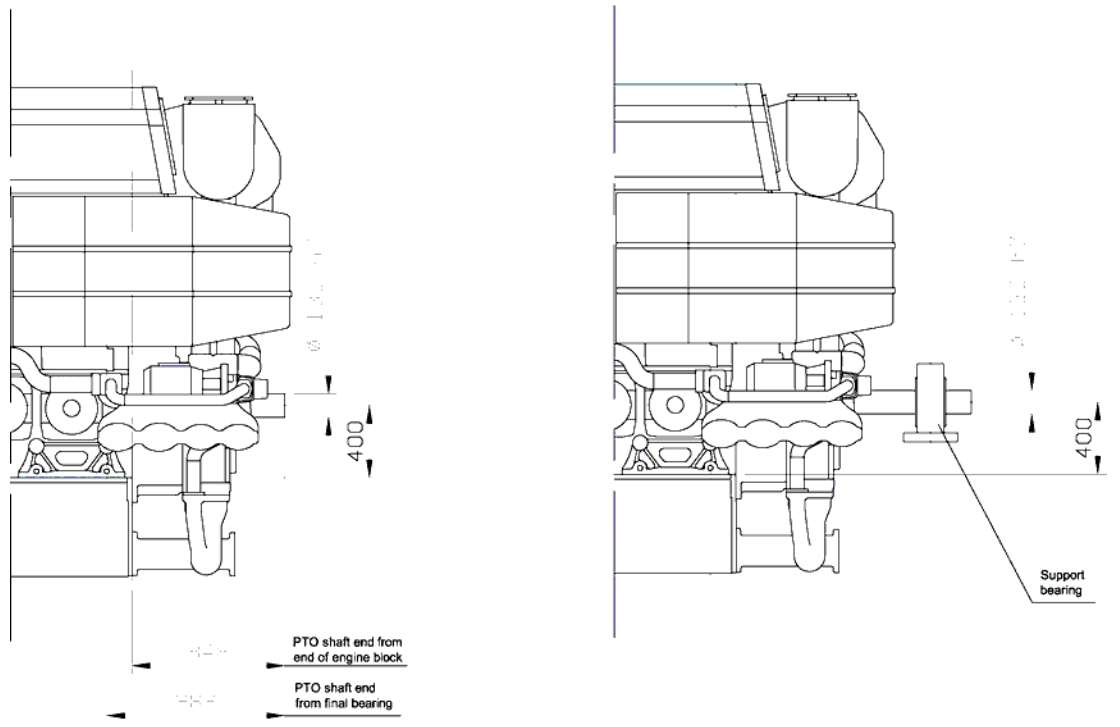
PTO-shaft arrangement of standard PTO shaft and with external support bearing for in-line engines
